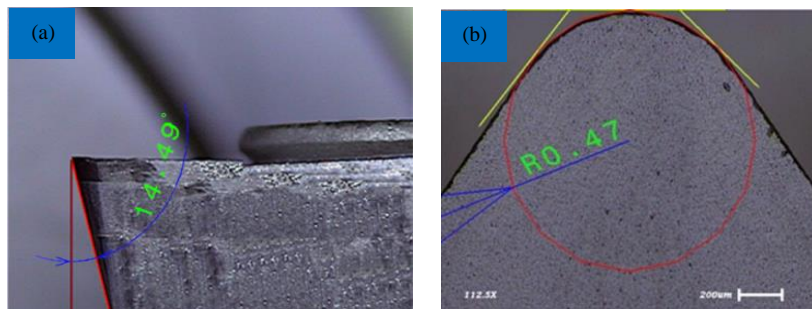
Image of the tool used in the experimental experiment by the VMS machine. a) Clearance angle of the tool, b) Tool nose radius
